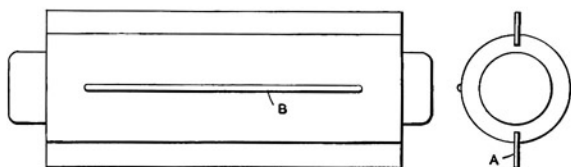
Mandrel for Babbitting Plain Bearing Caps
